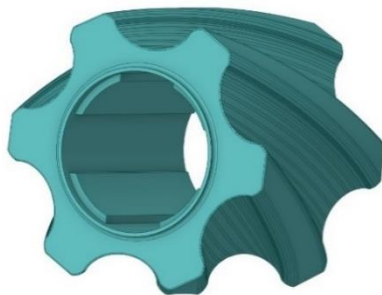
3D model of external mesh helical gear pump gear before improvement.
